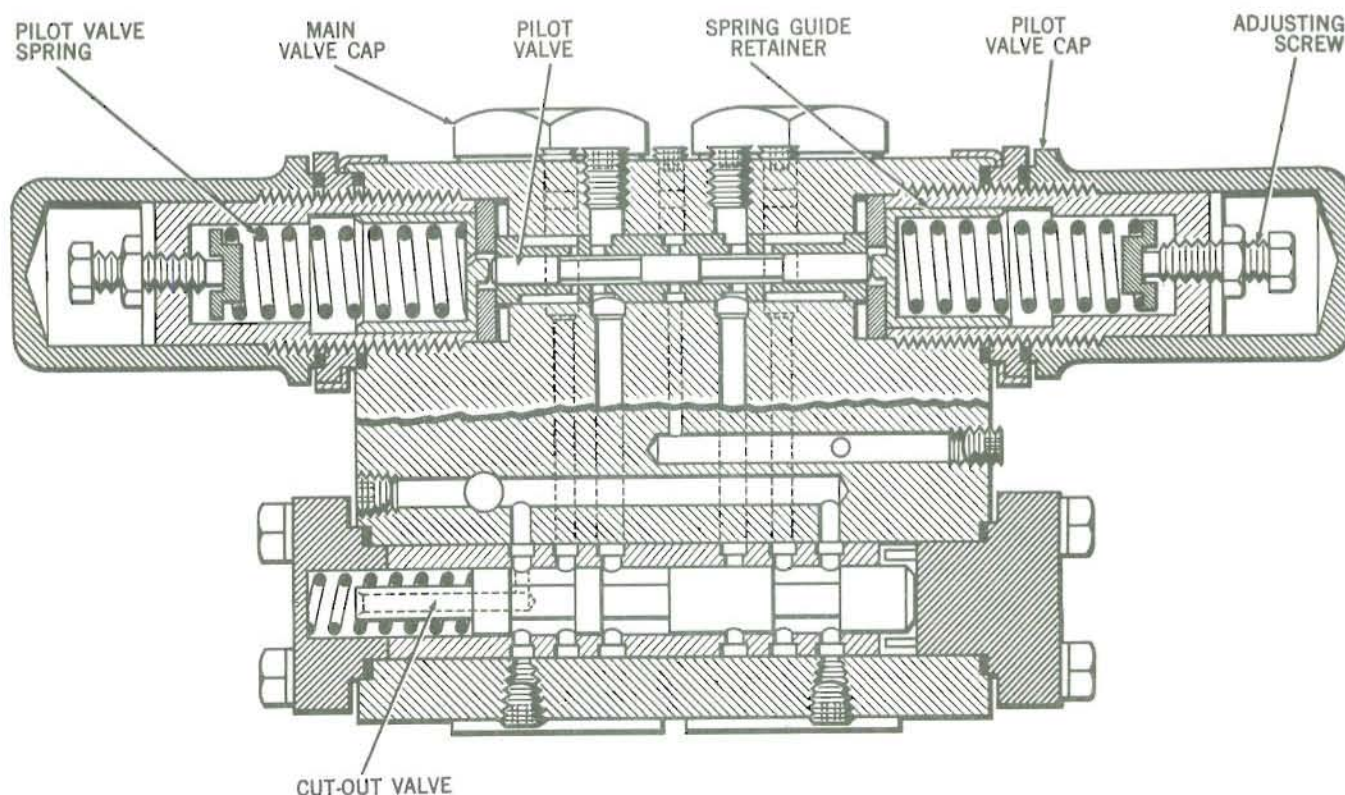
Elevating Gear Main System Relief Valve Adjustment, Sectional View
